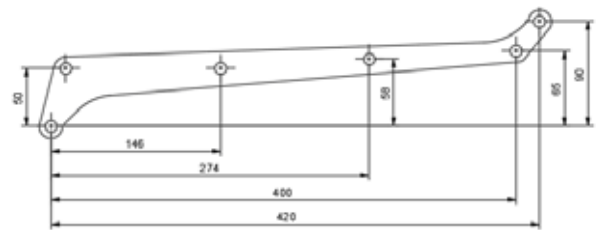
Position and dimensions of the fastening holes of the 2nd link
